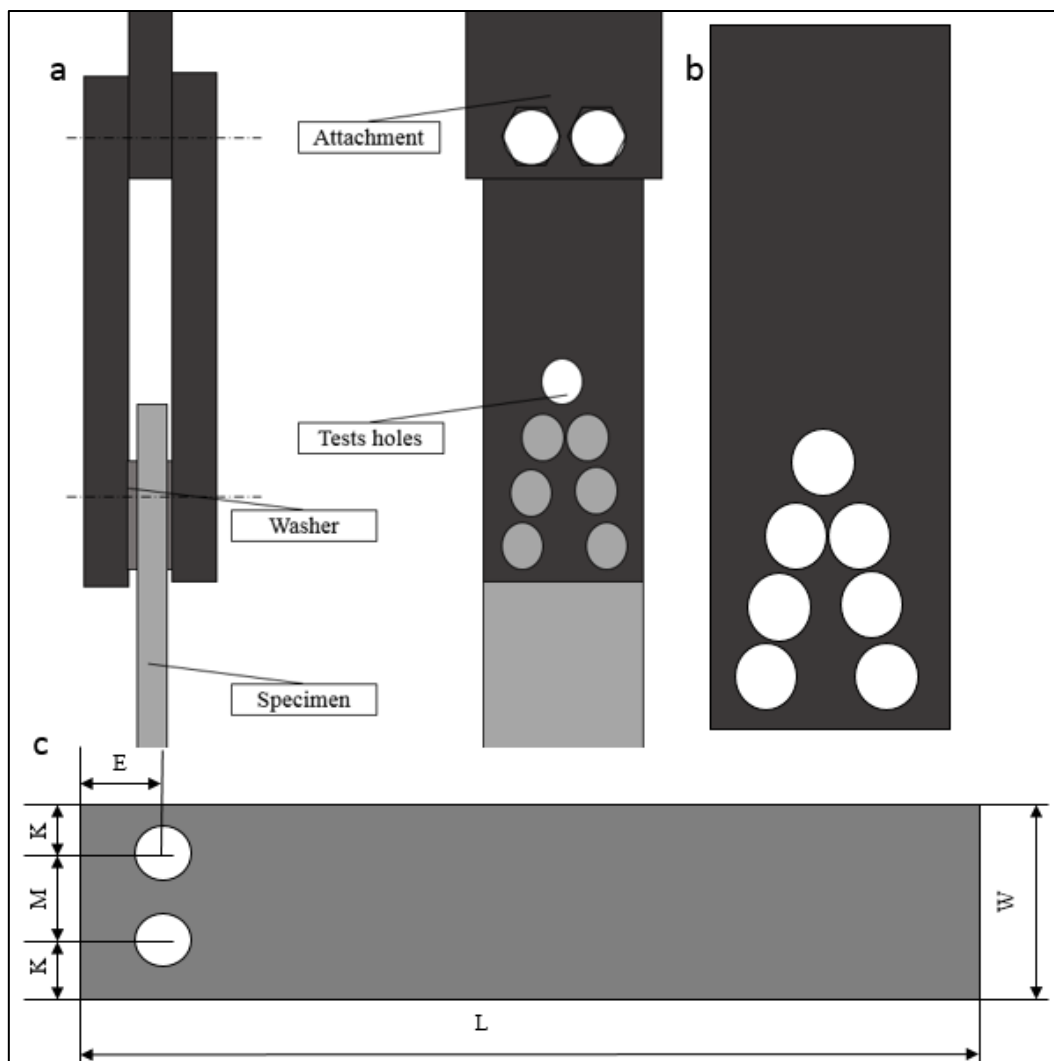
Test set up; a) Test attachment, b) Drilling jig, and c) Specimen dimensions nomenclature
